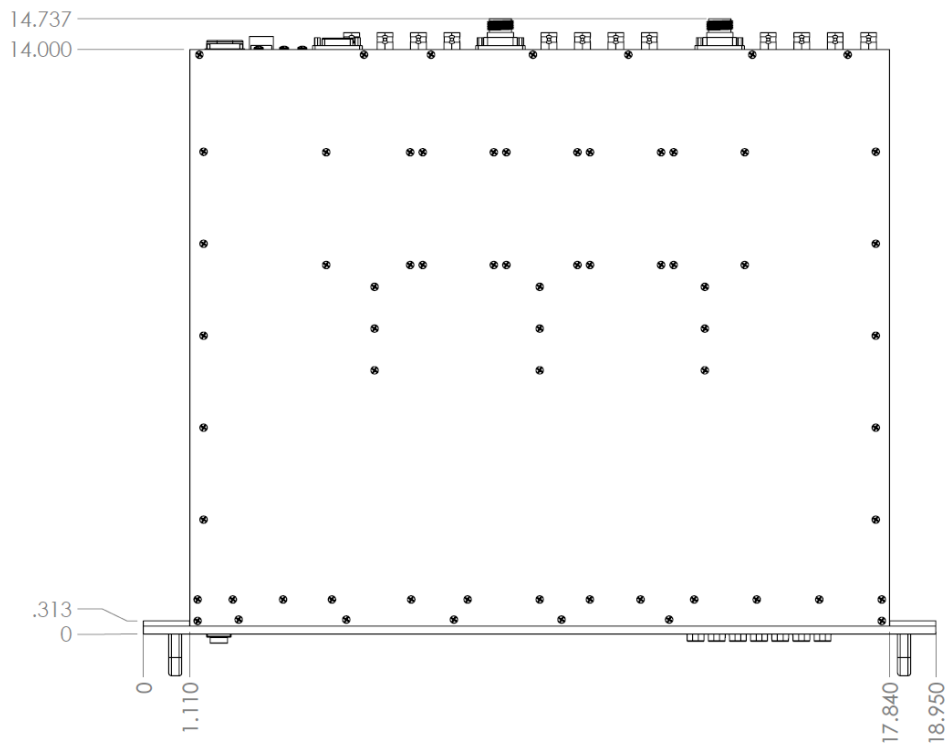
Mechanical Drawing – 1U Top View (Dual-channel Connectors Shown)
